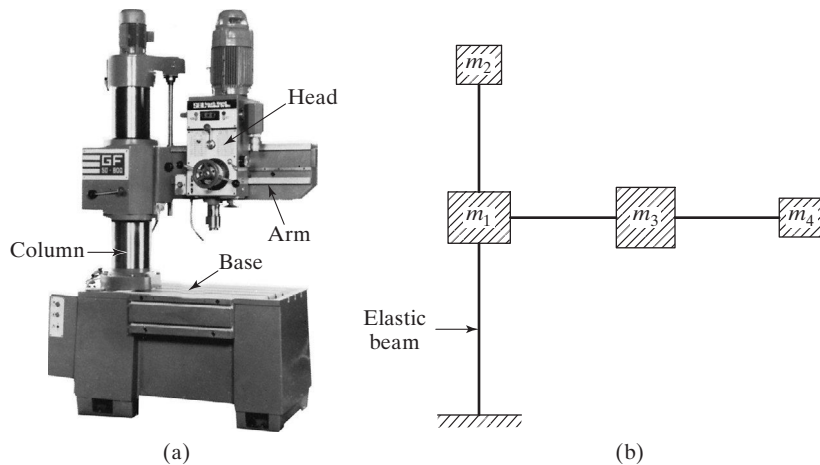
Radial drilling machine. (Photo courtesy of South Bend Lathe Corp.)
